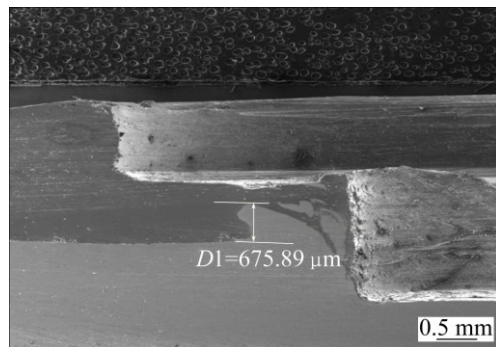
Copper ring length of spot weld produced at 1200 r/min, 1 mm shoulder plunge depth using flat pin and shoulder tool
